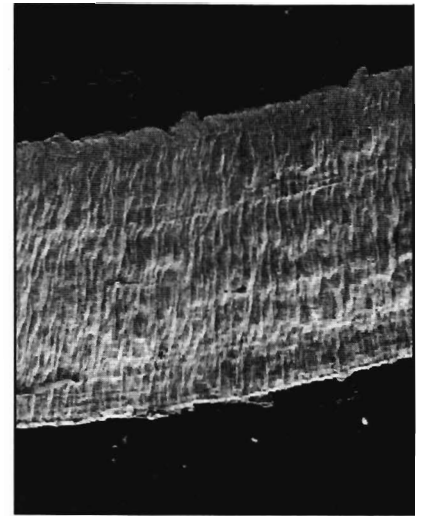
Lathe swarf surface of machined 95%Pt-5%HTA
